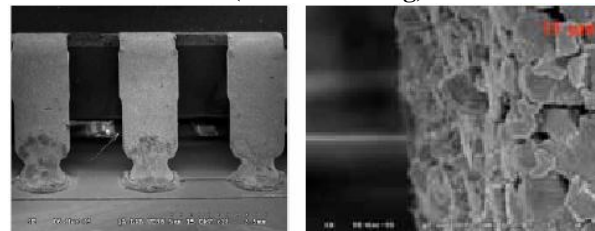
SnPb-LQFP on board (SnPb mounting) whisker in TCT 1000cycle
